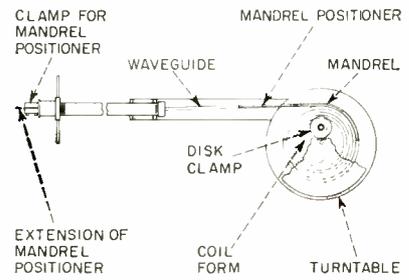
Final setup for winding waveguide into 40-ft coils. Mandrel is held in position where the forming takes place
